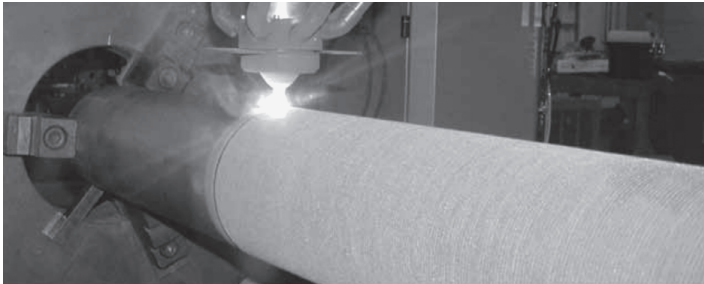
Laser cladding of a hydraulic piston rod<sup>18</sup>.
